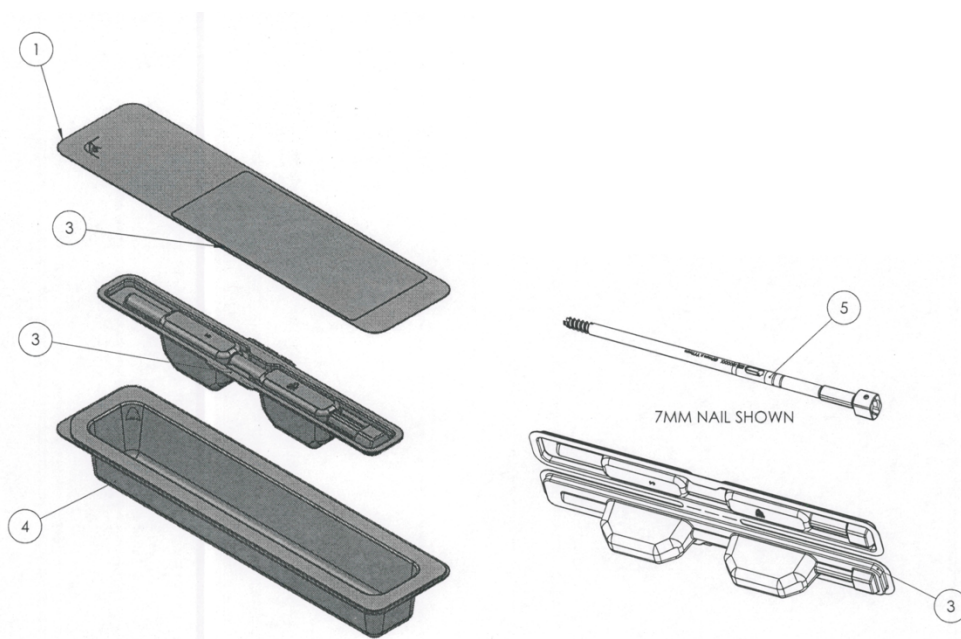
(left) Inner tray components including inner lid, clamshell, and inner tray. (right) Clamshell and assembled dynamic prototype device.
